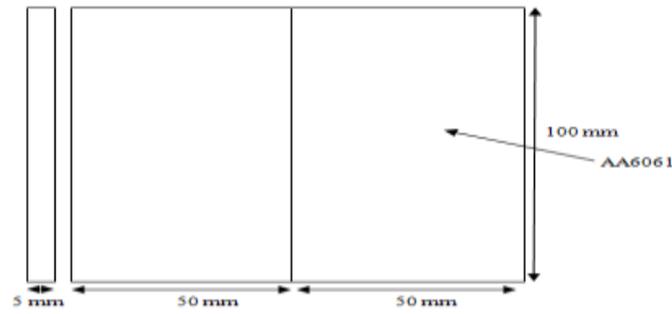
Square Butt Joint for Friction Stir Welding
